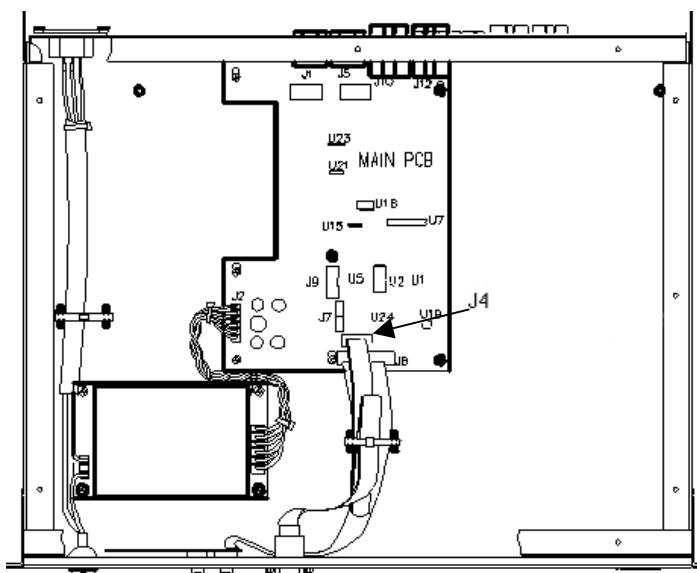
The RS232 ribbon cable that connects to J4 on the main PCB.
